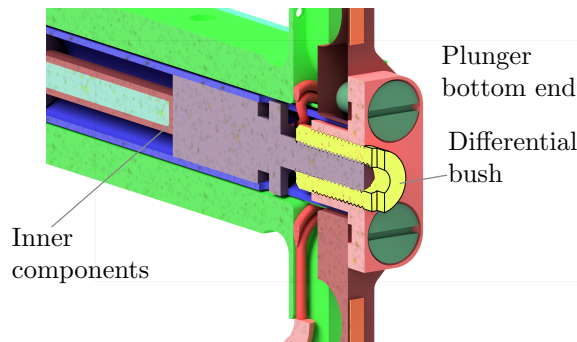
Section view of the plunger bottom end. The differential bush has two threads, one external, engaging with the plunger, and one internal, engaging with a slider inside the plunger. The slider, when moved, changes the z position of the series of internal components of the GPRM, which constitute the actual release mechanism.
